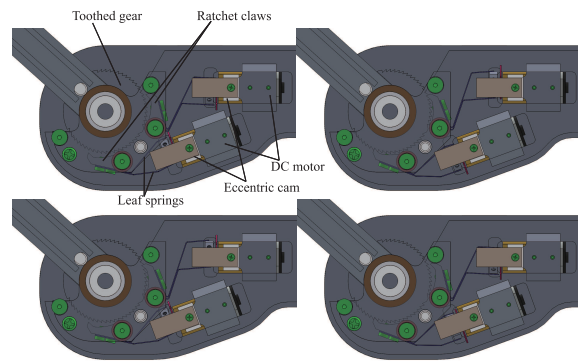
Upper left; Pattern of the meshing of ratchet mechanism which elbow joint moves freely. Upper right; Pattern of the meshing of ratchet mechanism which elbow joint is completely locked. Lower left; Pattern of the meshing of ratchet mechanism which elbow joint is completely locked in the direction of the flexion movement and moves freely in the direction of the extension movement. Lower right; Pattern of the meshing of ratchet mechanism which elbow joint is completely locked in the direction of the extension movement and moves freely in the direction of the flexion movement.
